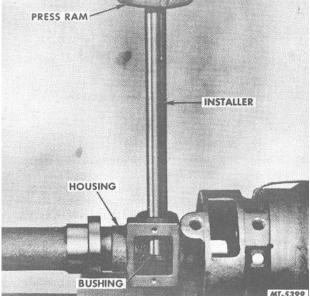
Installing Tachometer Drive Shaft Bushing Using Installer SE-1722
